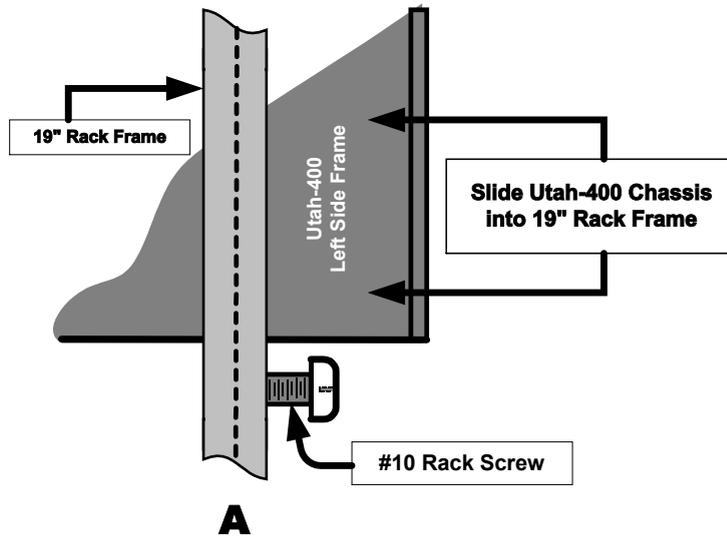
Sliding the Utah-400 Chassis into Rack Frame
